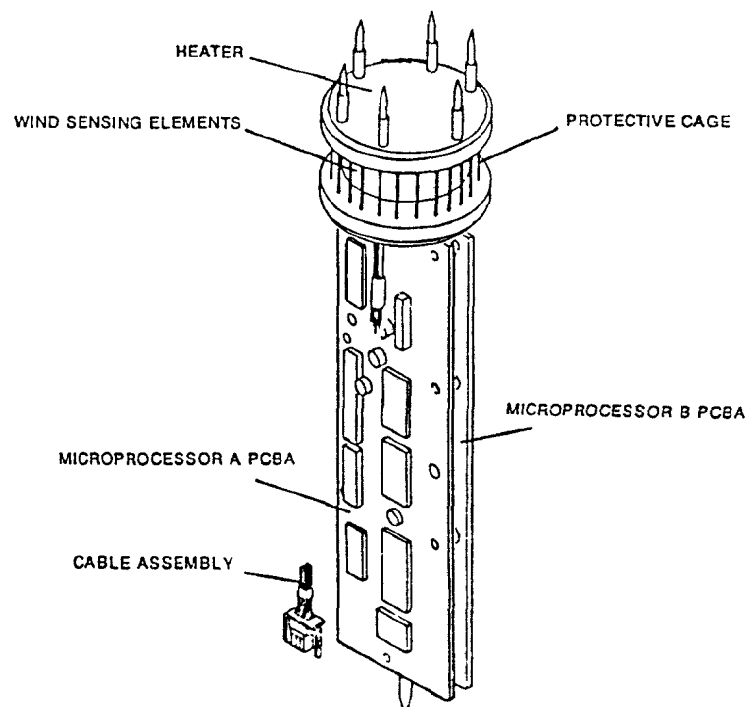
Wind Speed and Direction Sensor, Control Assembly
